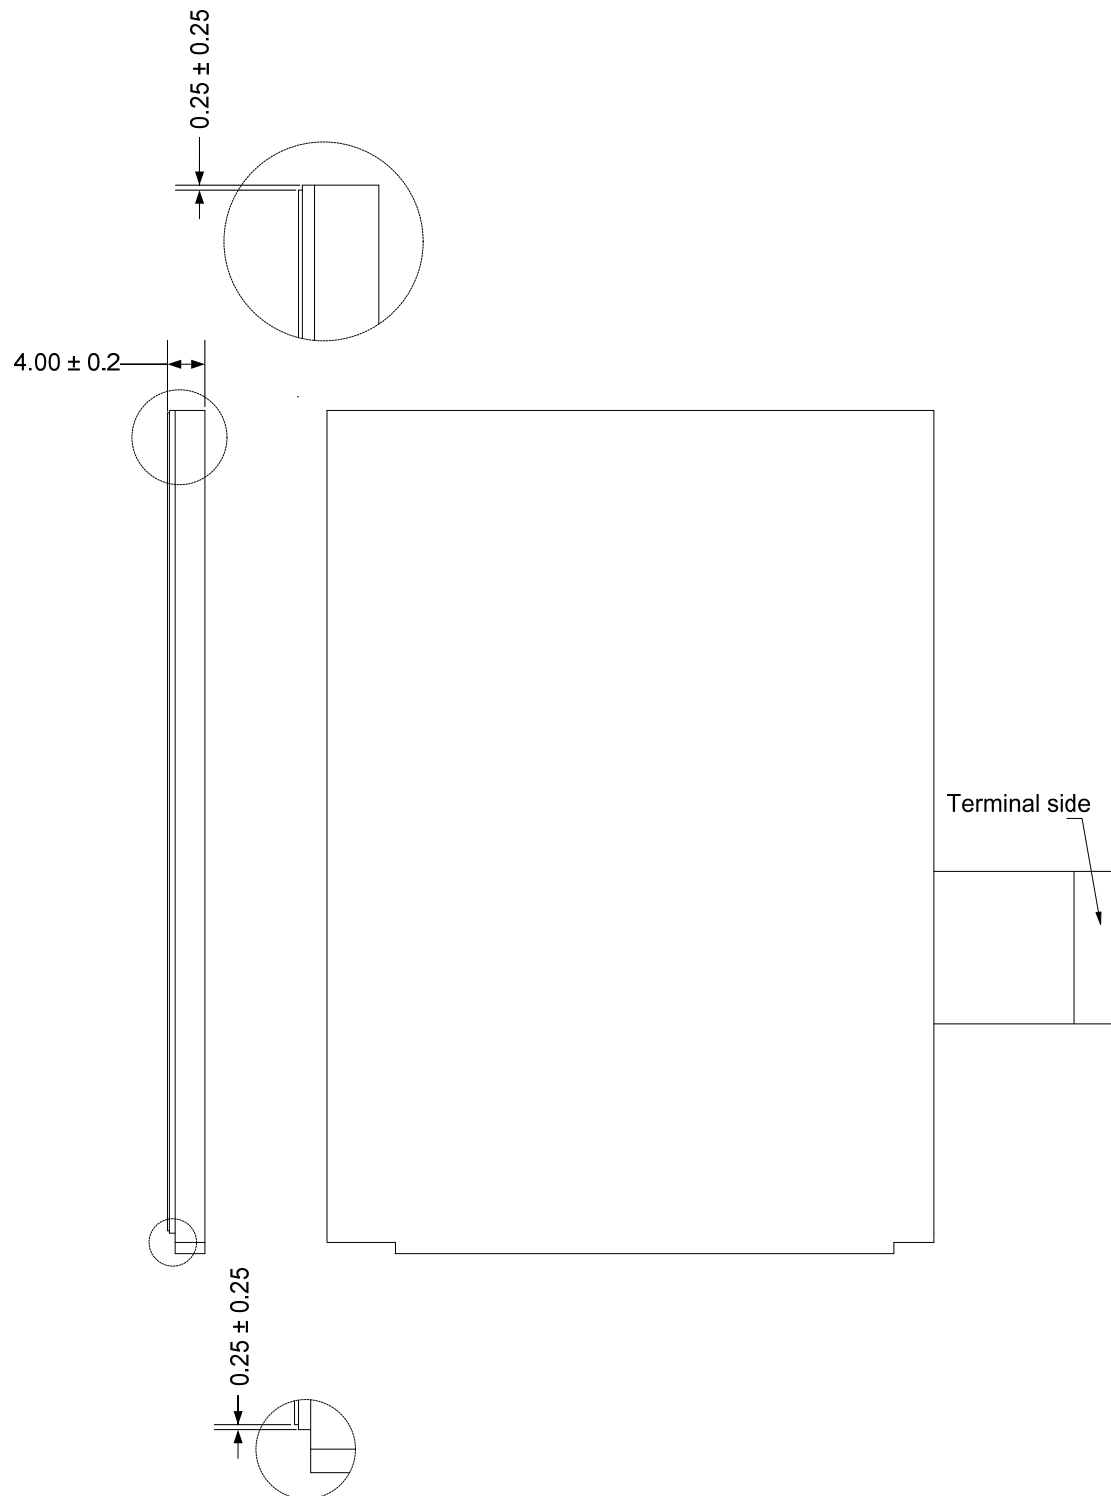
3.5-inch Mechanical Outline (Back View)
